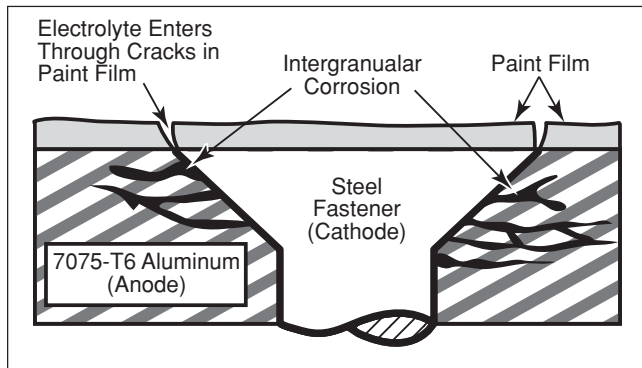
Intergranular Corrosion of 7075-T6 Aluminum Adjacent to Steel Fastener
